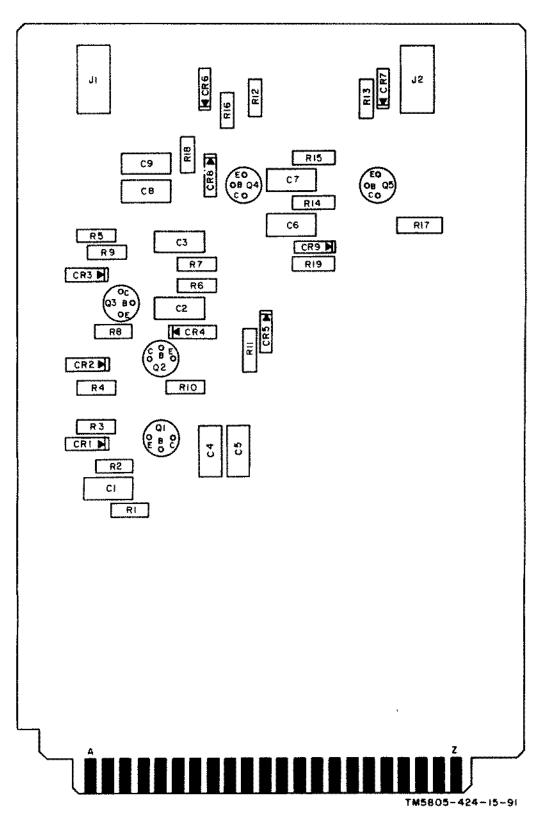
Printed-circuit card assembly A20A2, A21A2, A22A2 (PC 80034190), component location diagram.
